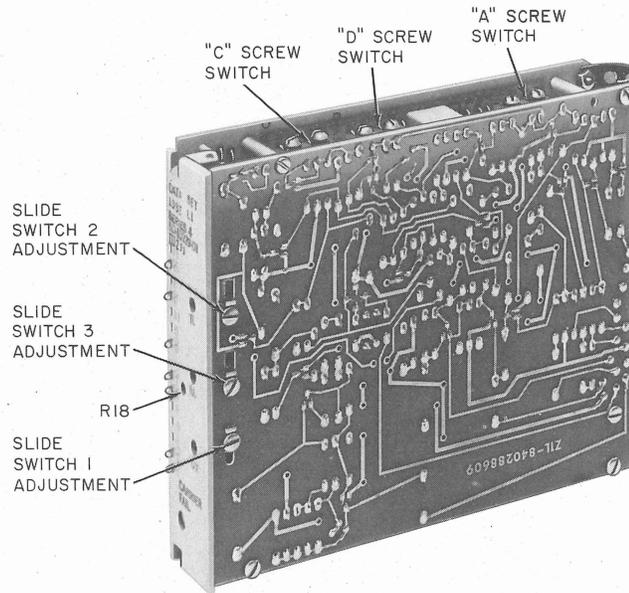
Data Set 108E-Type—Locations of Test Points and Screw Switches
